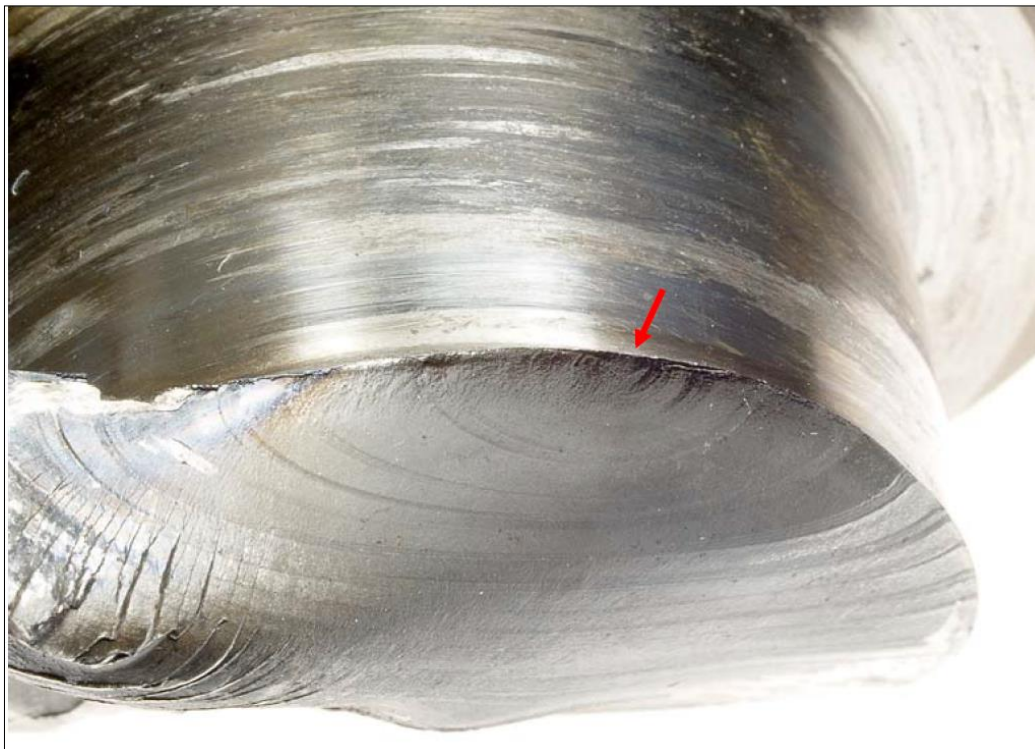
Detailed view of the fatigue crack initiation site, journal side
